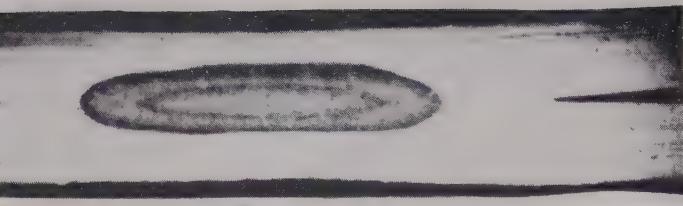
Typical cross-section of spot weld in 0.045-inch material
